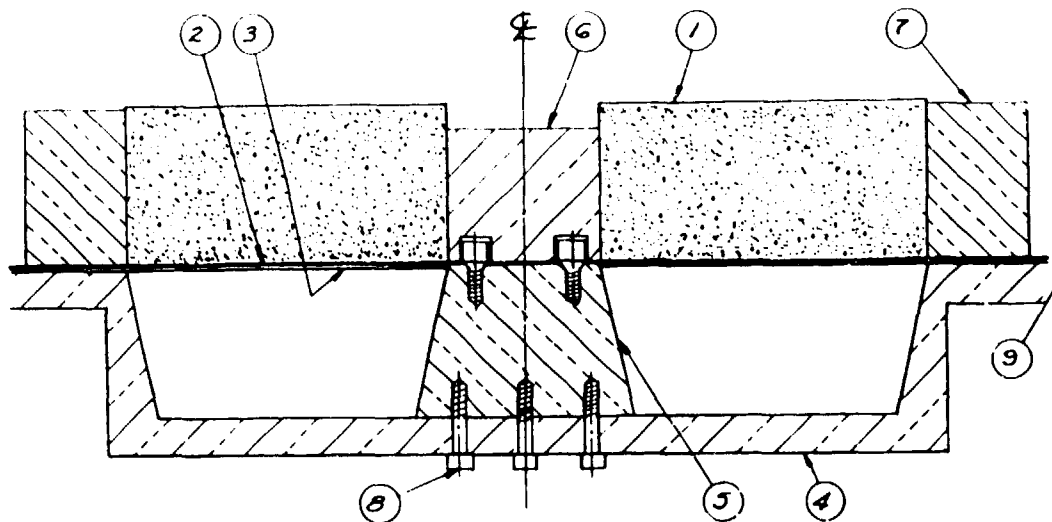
Disk generator details: 1) explosive ring, 263.5-mm OD, 50.8-mm ID, 50.8-mm high. Other generator dimensions drawn to scale; 2) driver plate, 1.6-mm-thick copper; 3) insulation, 0.7-mm thick; 4) bottom plate and cylindrical glide surface, copper, one piece; 5) central post, tantalum or copper; 6) top explosive support piece, tantalum or copper; 7) explosive support ring, brass; 8) screws, four at top of post, five at bottom; 9) plates extended for radial cable connections with appropriate clamps and O-rings.
